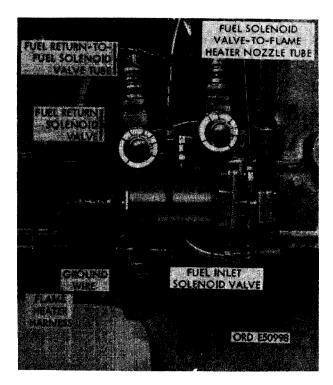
DISCONNECTING OR CON-NECTING FLAME HEATER SOLENOID VALVE TUBES AND HARNESS.
